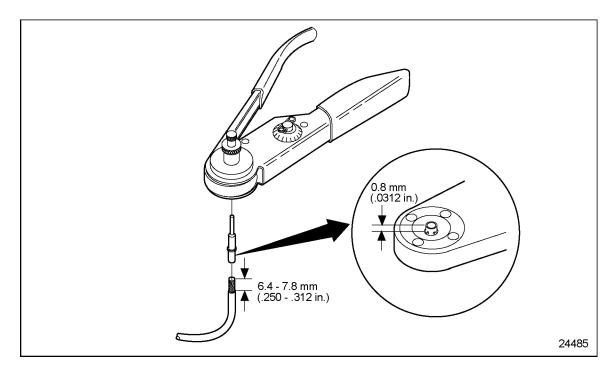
Setting Wire Gage Selector and Positioning the Contact
